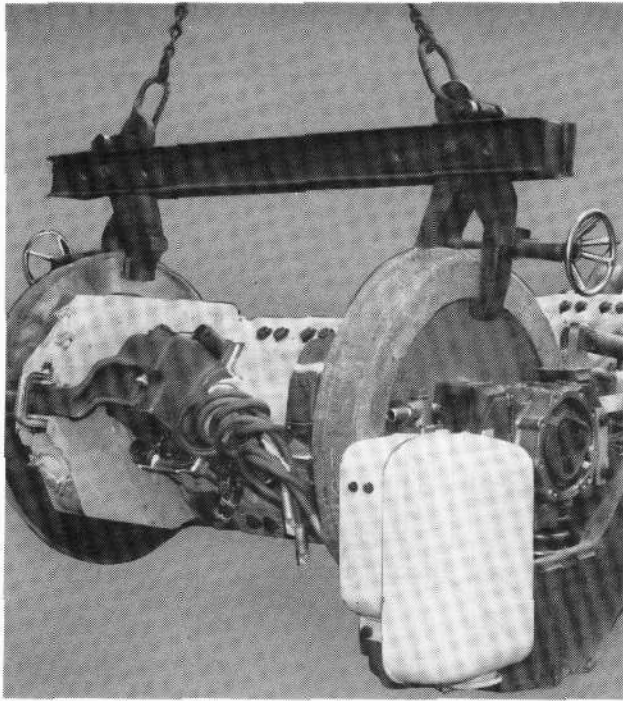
Removal Of Wheel, Axle, And Motor Assembly
